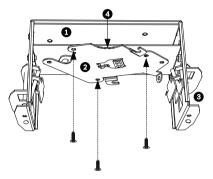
Attach Mounting Plate to Mounting Bracket
